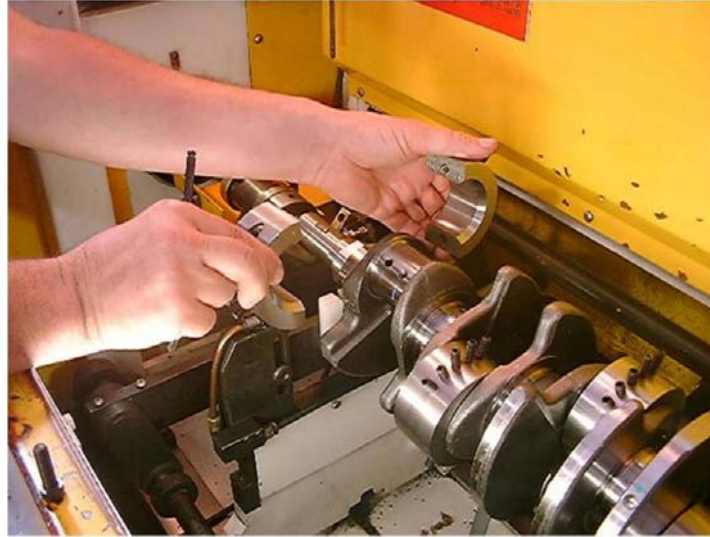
A photo of crankshaft balance machine (see online version for colours)
